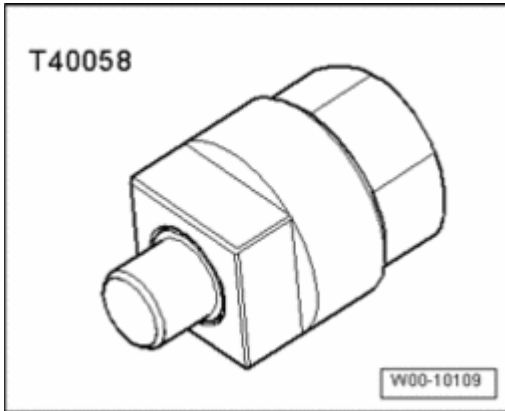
Identifying Special Tools - Camshaft Timing Chains, Removing From Camshafts
